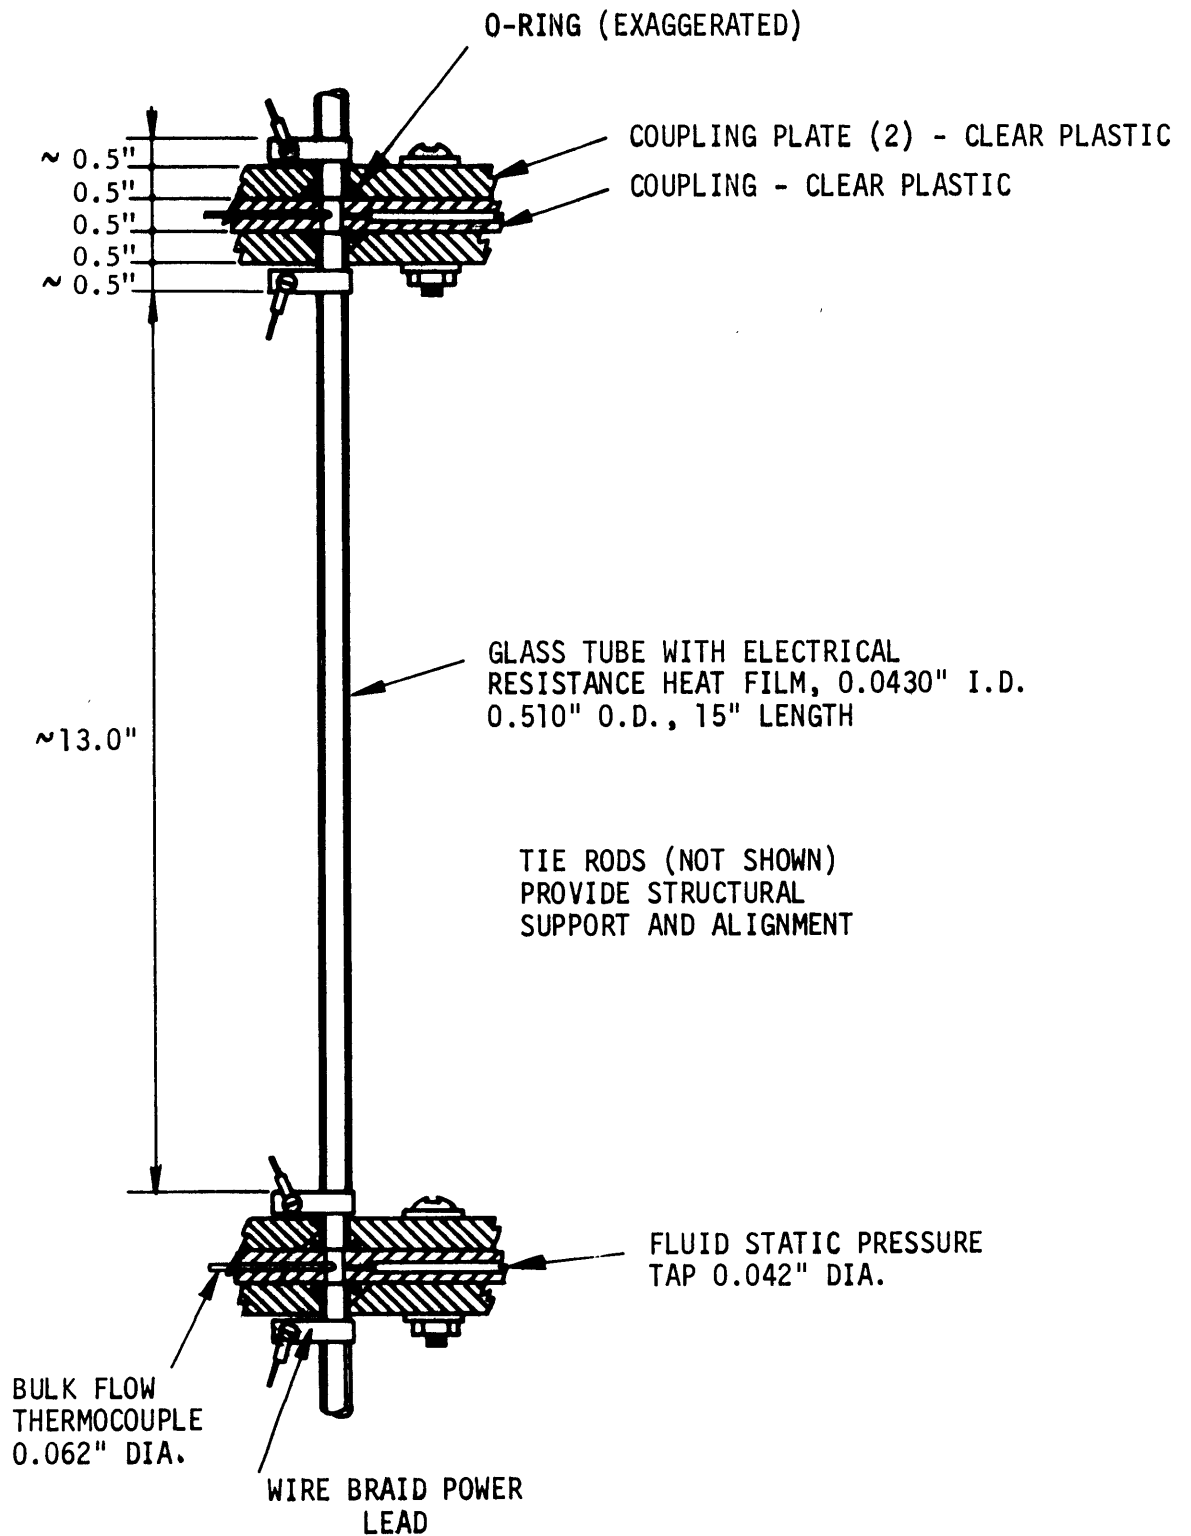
CROSS-SECTIONAL DETAIL OF TEST LENGTH AND COUPLING
